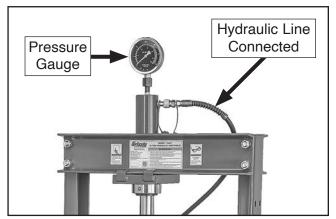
Pressure gauge and hydraulic line connected to hydraulic ram.
